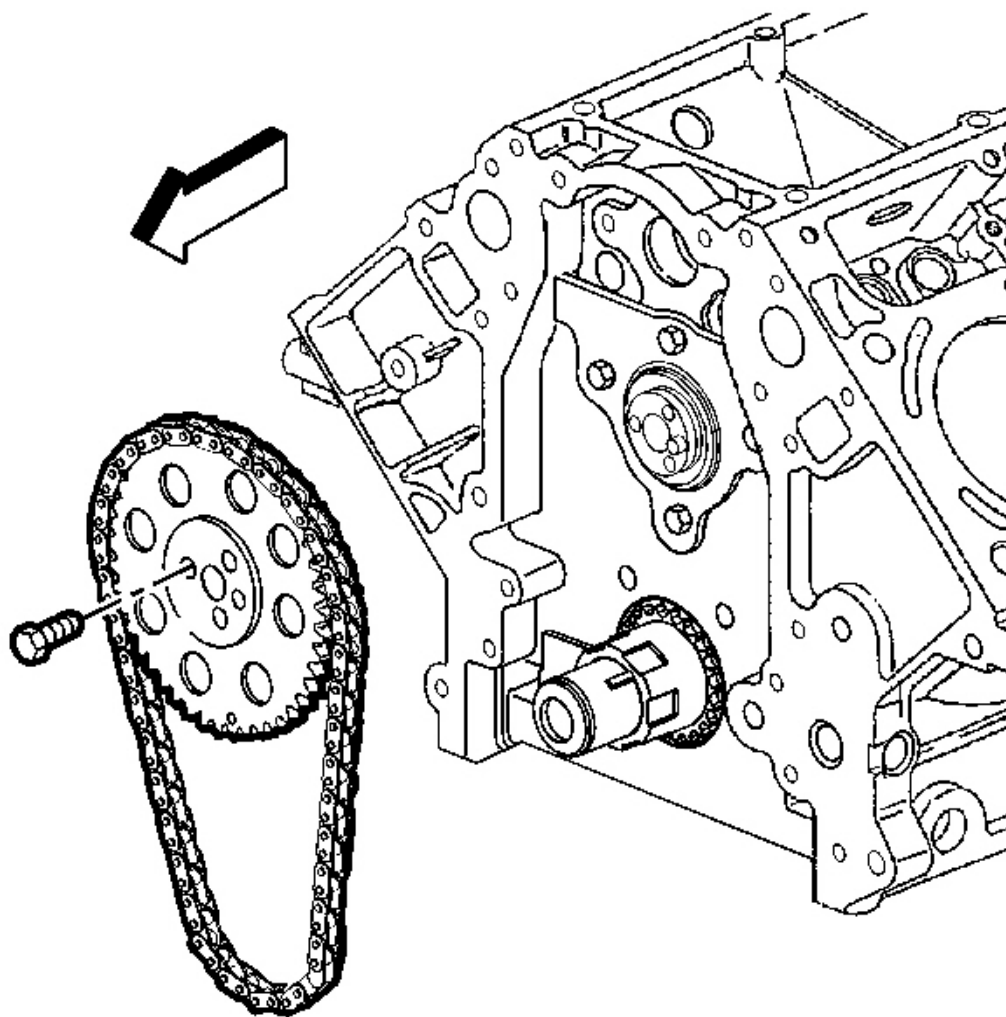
View Of Camshaft Sprocket, Bolt & Timing Chain
